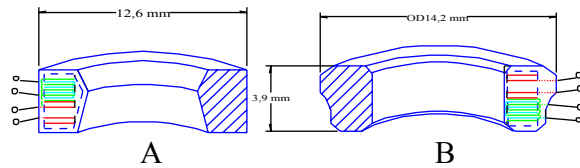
Schematic presentation of the two final prototype designs. Type A is designed for mounting on centre pin, while Type B can be mounted into a hole in a PCB.
